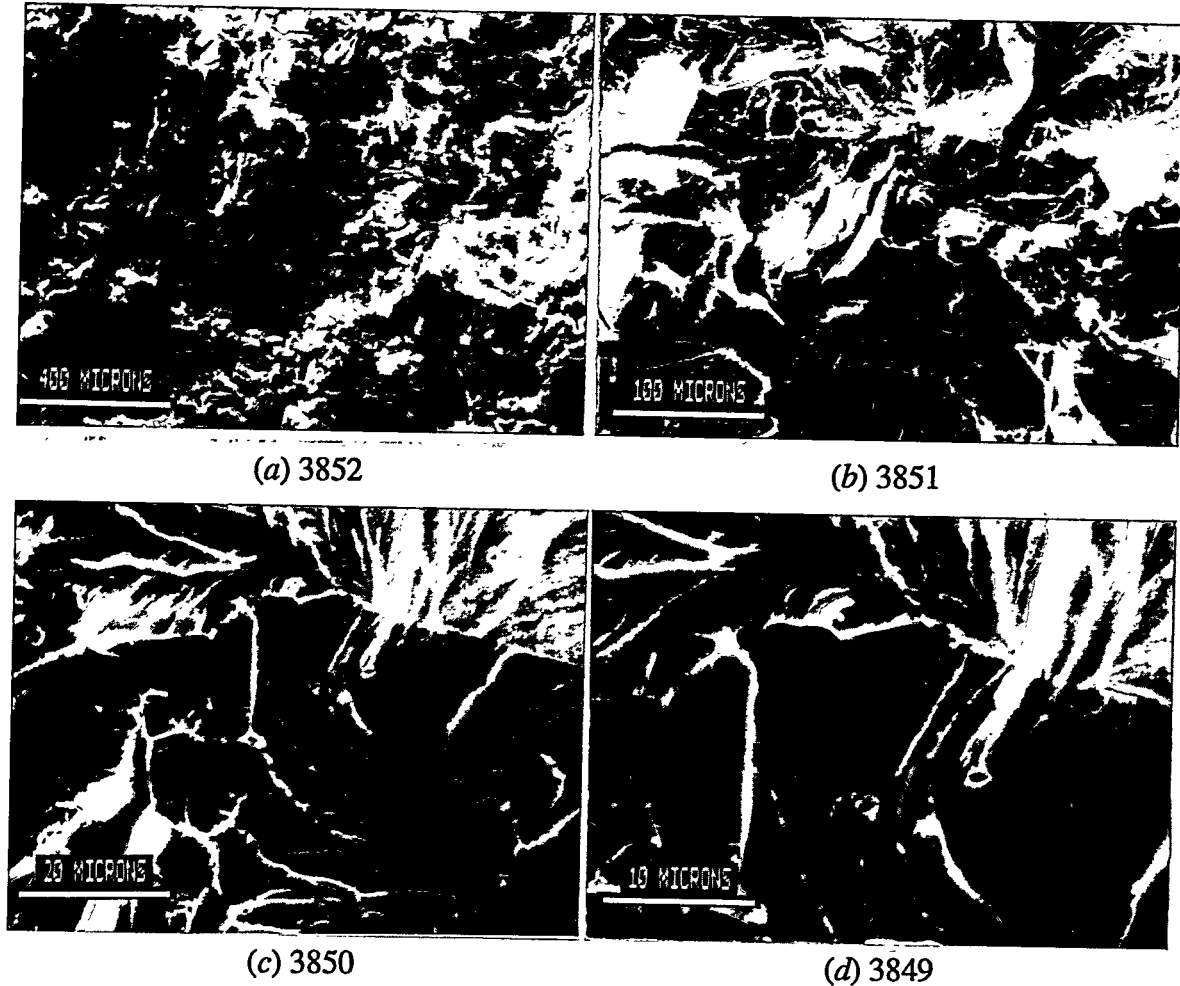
Fracture surface details of room-temperature tensile-tested specimens from vacuum-melted and extruded bar of FAPY: (a) 50 \times , (b) 200 \times , (c) 1000 \times , and (d) 2000 \times .
